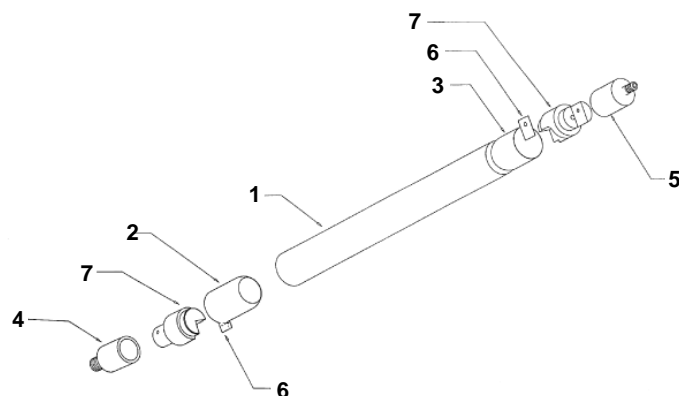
Proportional tube assembly drawing. (1) Mylar tube; (2), (3) modified cigar tubes to anchor assembly; (4) end-cap with o-ring groove and threaded neck to interface with gas manifold and HV distribution; (5) end-cap with hose barb; (6) G-10 pad for wire (7) wire holder.
